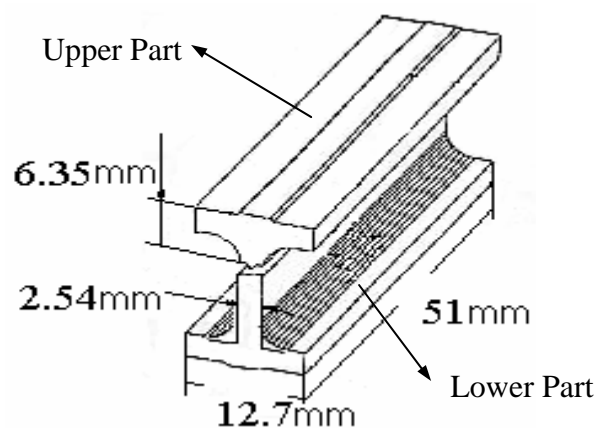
AWS ultrasonic welding sample [9]
